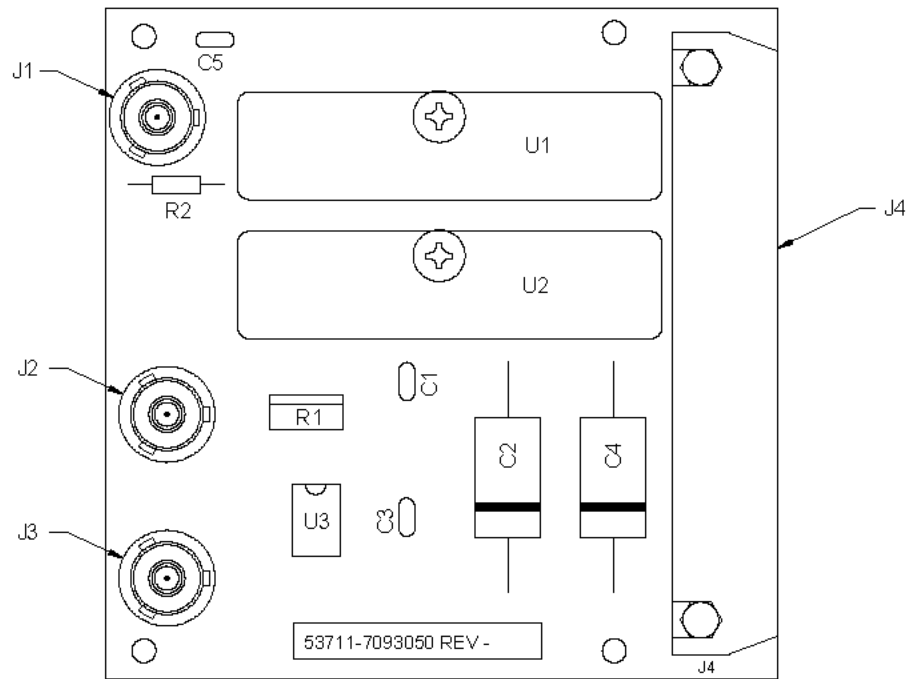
Components in Card Cage (A1) (Sheet 2)
